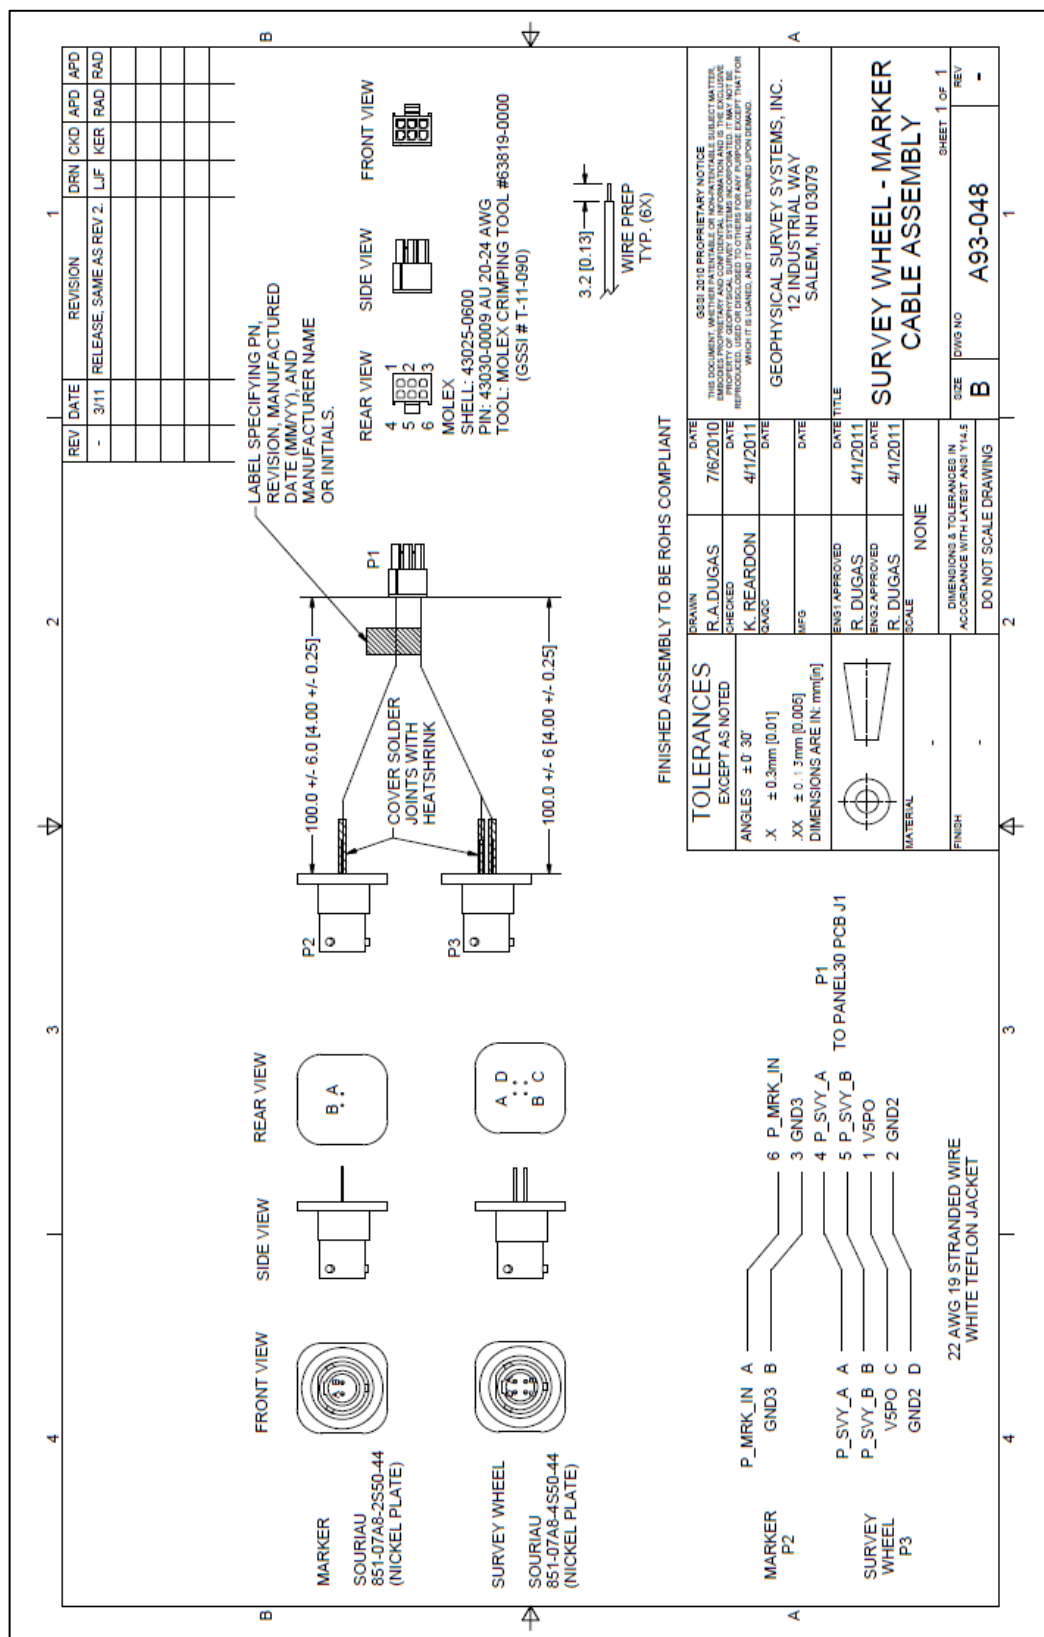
Survey Wheel and Model 10 Marker Pin Out.
